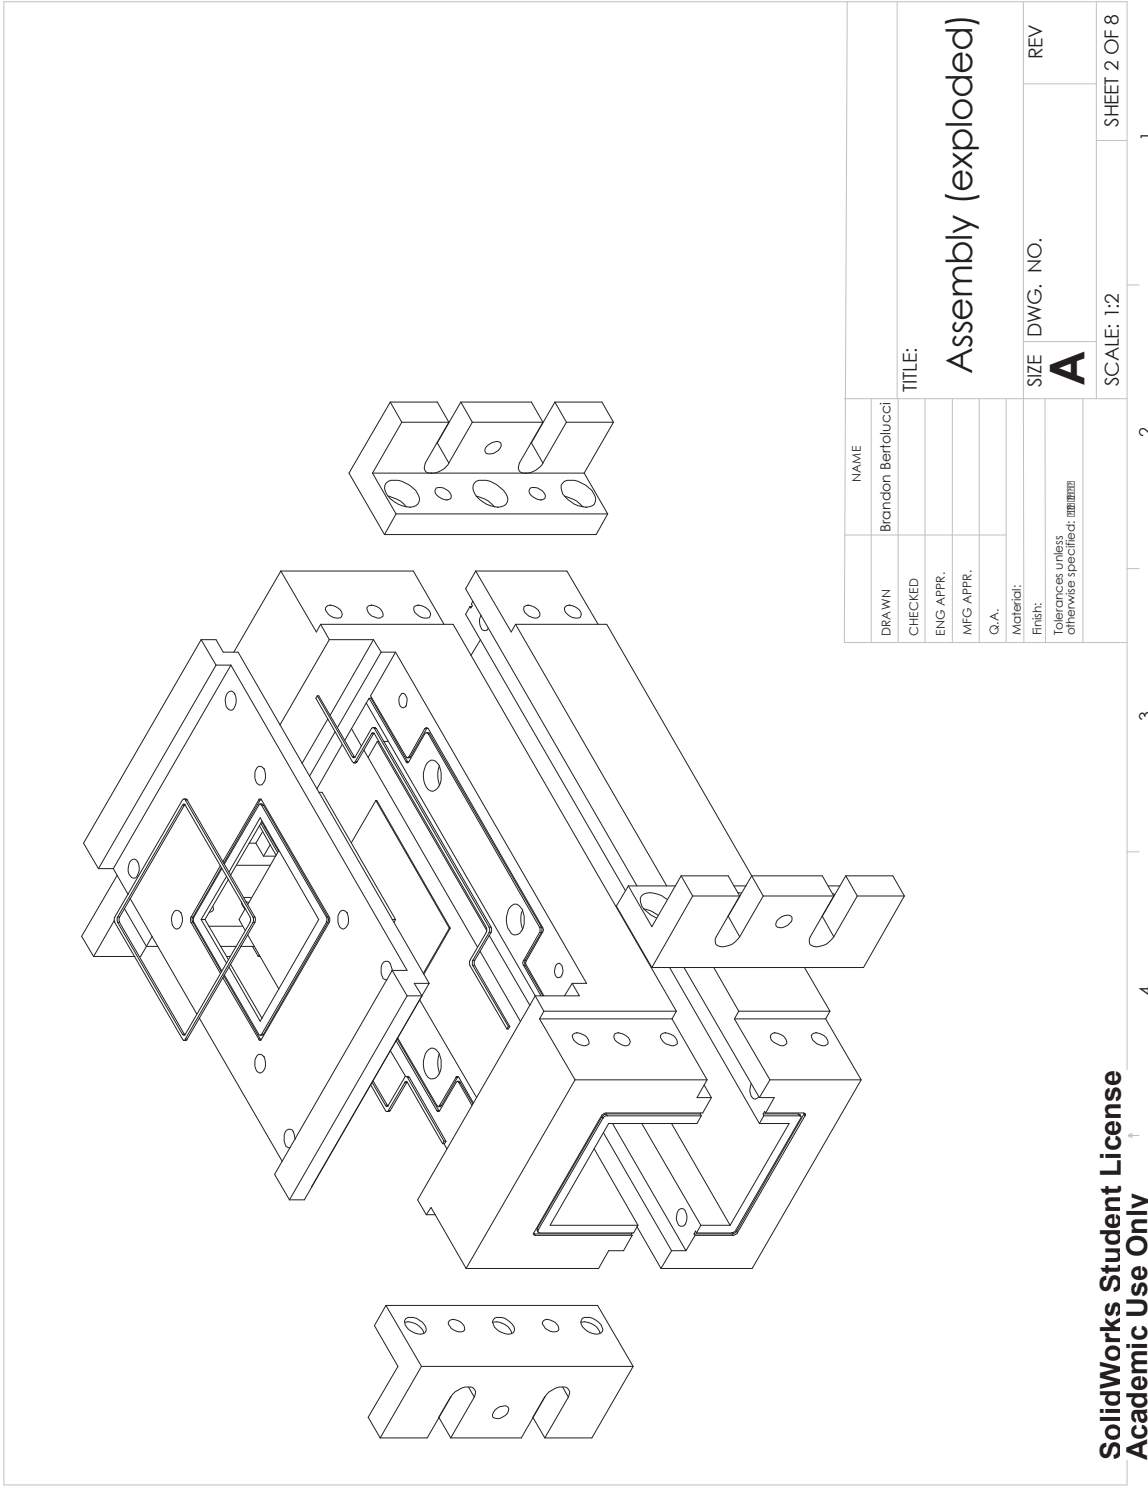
Exploded isometric solid view of speaker section with mounting brackets.
